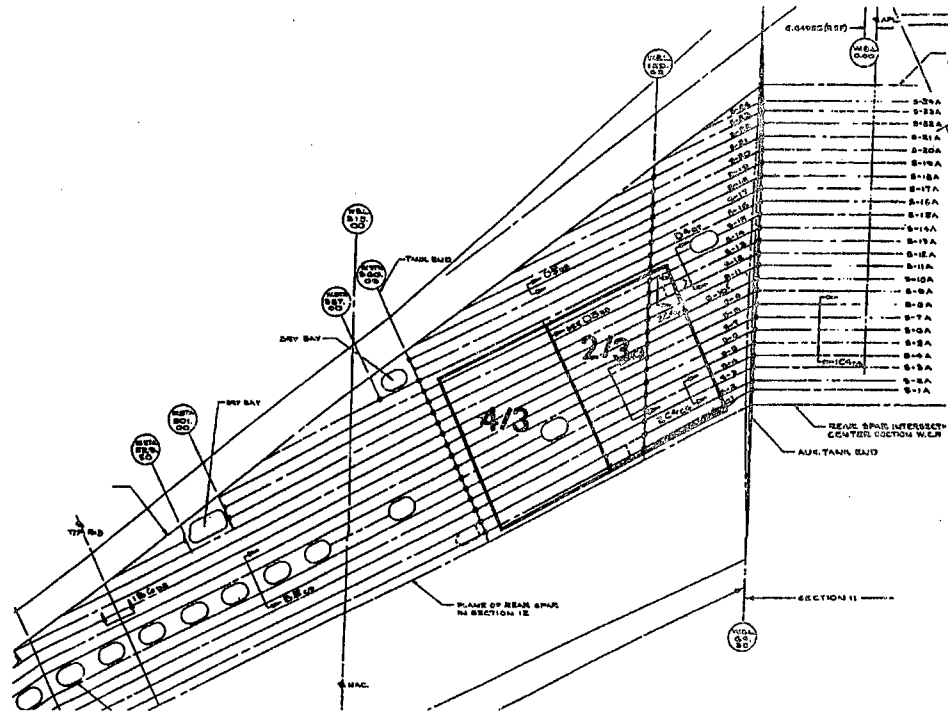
CZ-180 (B707-123) Lower Wing Teardown and Inspection Sections
